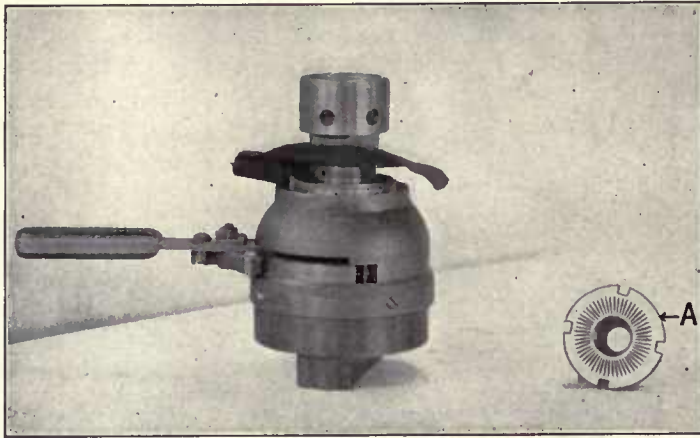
Chuck for Milling Grooves on Injector Water Nuts.
